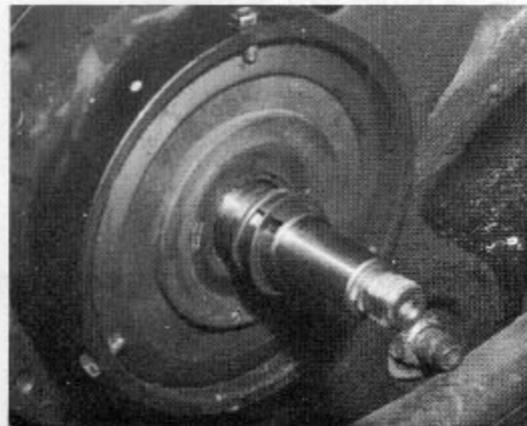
Inspect shims and spacer on compressor crankshaft.
